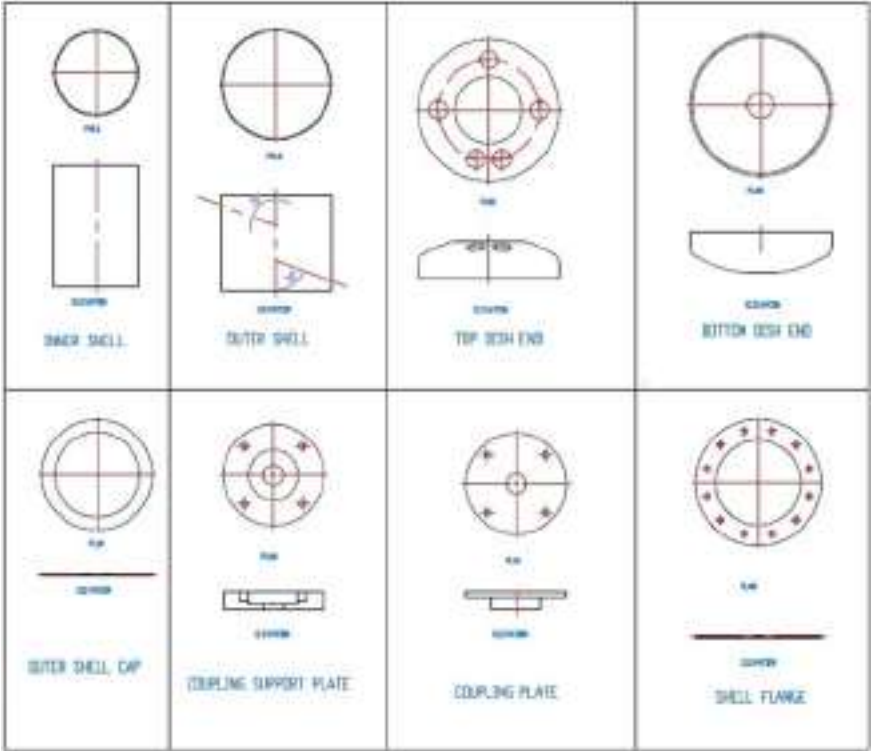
Technical drawings-2 of each part with the assembly of batch reactor of laboratory scale
